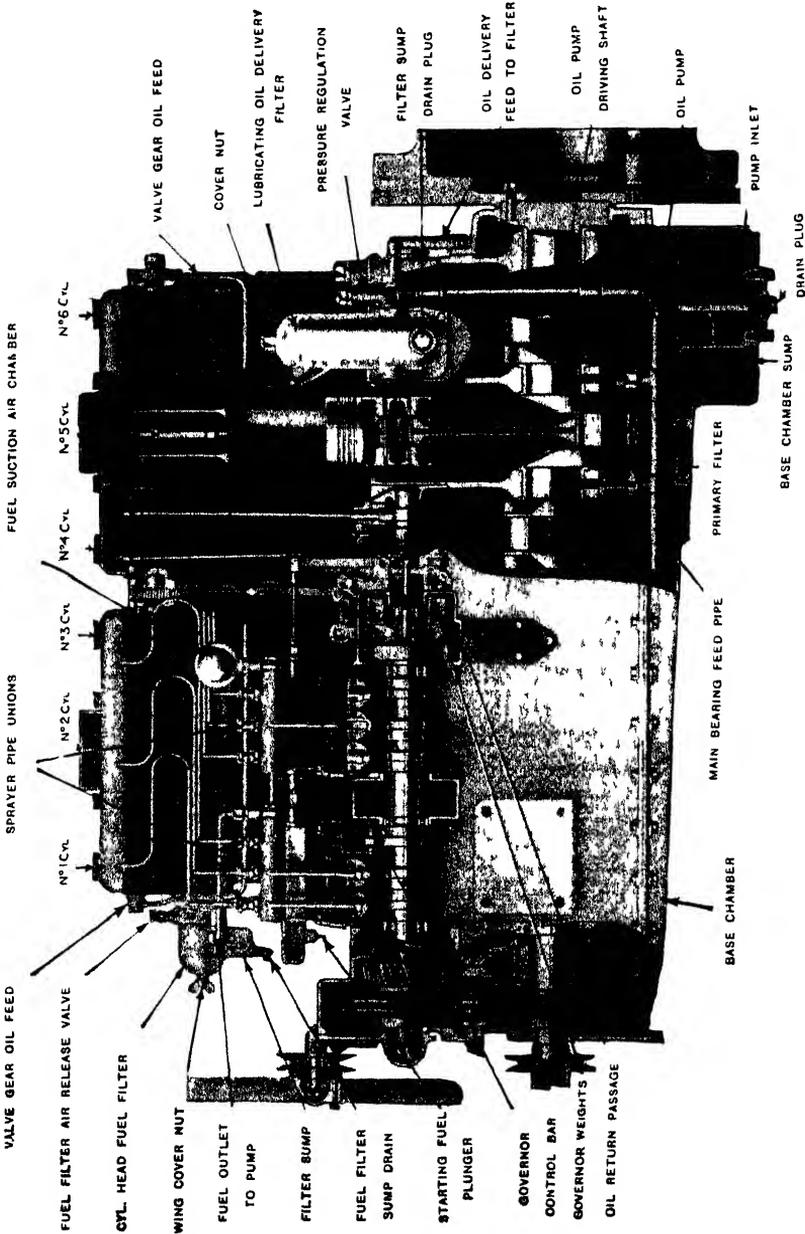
Part Sectional Elevation of Gardner Six-cylinder Engine
